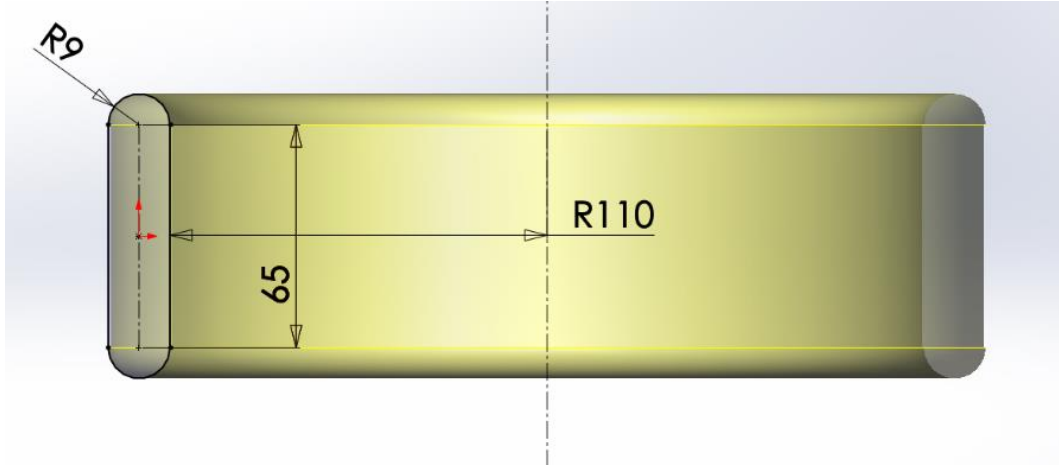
Front view of TORODYNA 1.0 structure with final dimensions.
